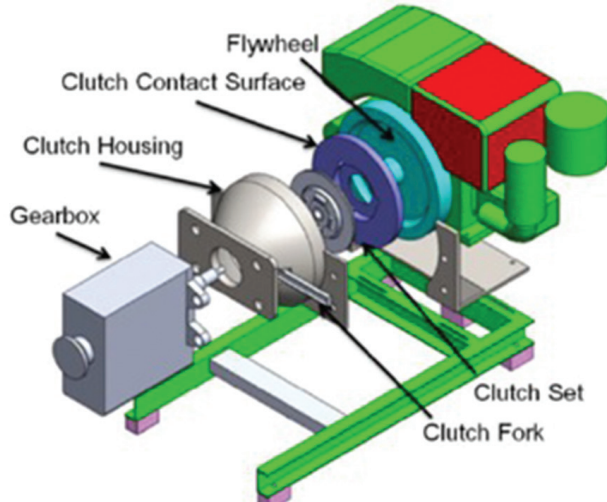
Engine – clutch – gearbox assembly (Koocharoenprasit, 2011)
